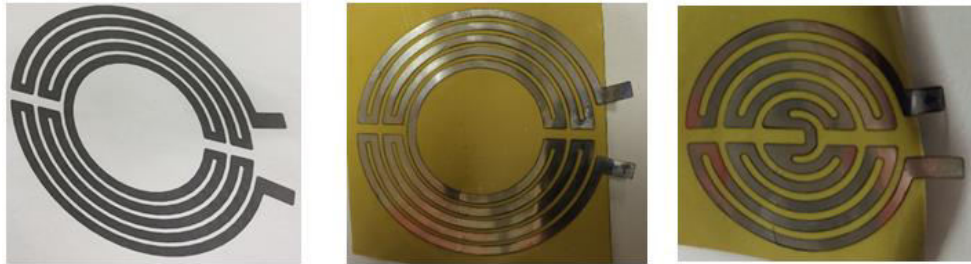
Custom heaters development in CAD drawn then laser machined
